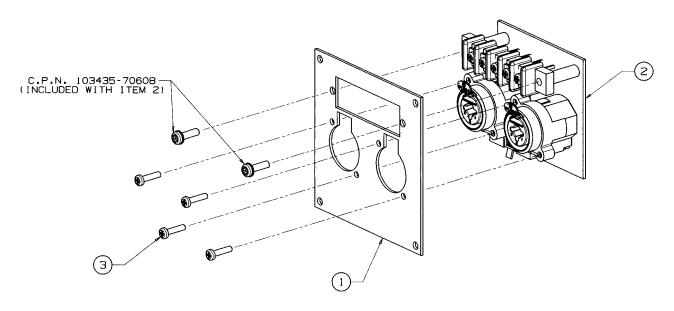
CE4000 Standard Input Assembly (Exploded View)
